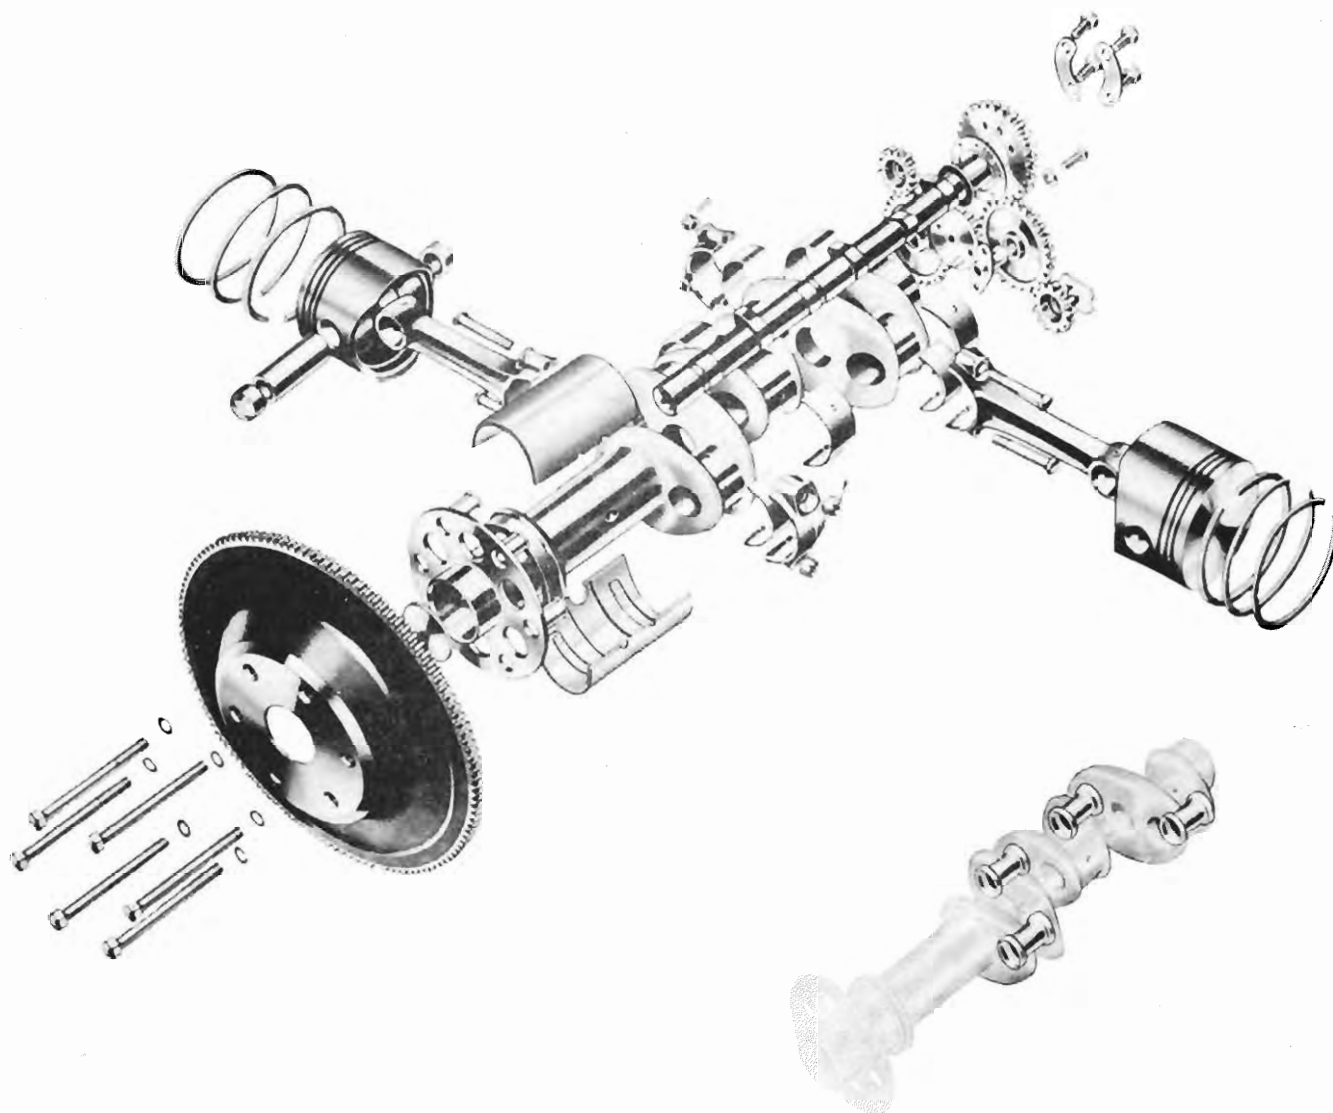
Exploded View of Crankshaft and Reciprocating Parts
